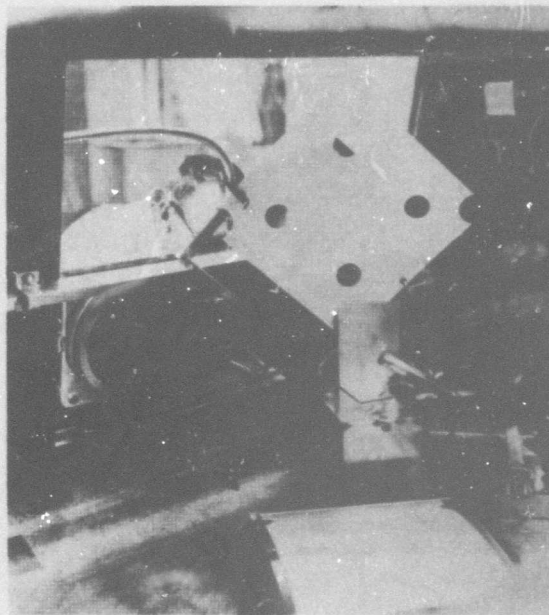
TIG WELDING OF EDGEMEMBERS IN
